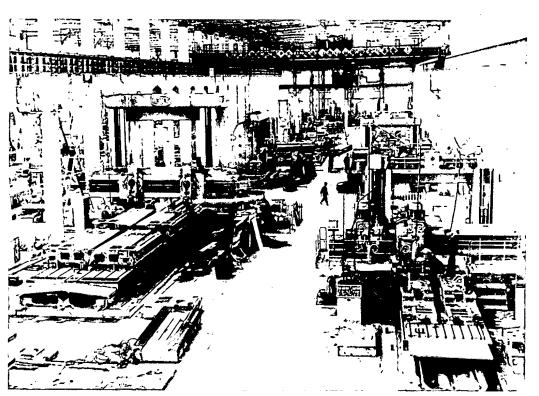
Communist China: Interior View of the Planer Department of the Wu-han Heavy Machine Tool Plant
